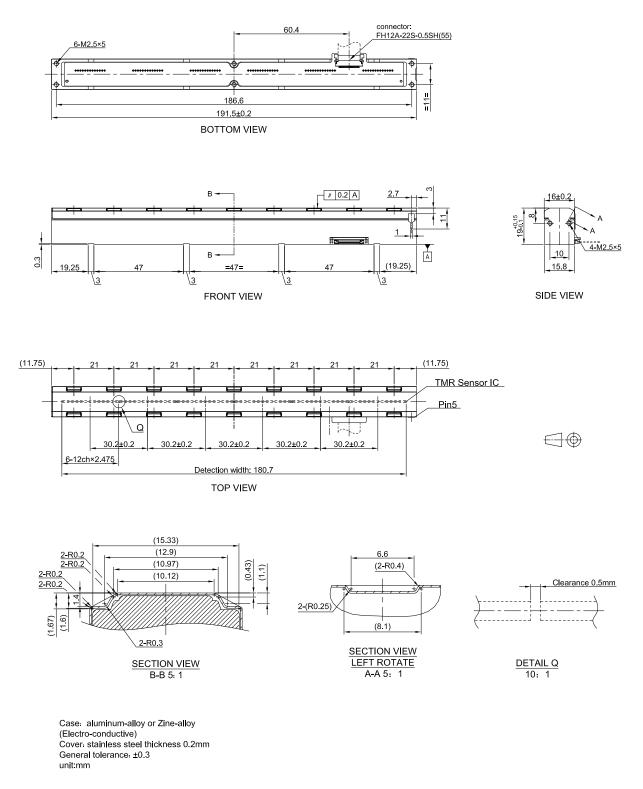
Dimension (unit: mm, tolerances for unmarked scales ±1 mm)
